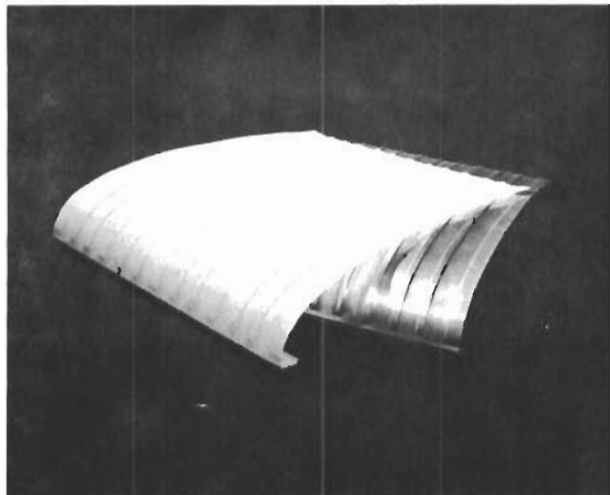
Finished vacuum bag laminate is shown with its mold.
